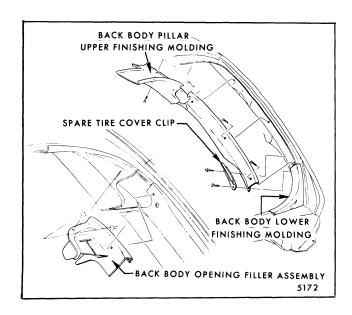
Back Body Pillar Upper Finishing Molding - Right Side Shown
